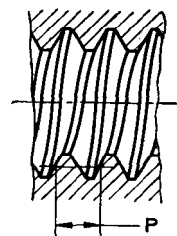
SINGLE-START THREAD WITH RIGHT-HAND INTERNAL THREAD
